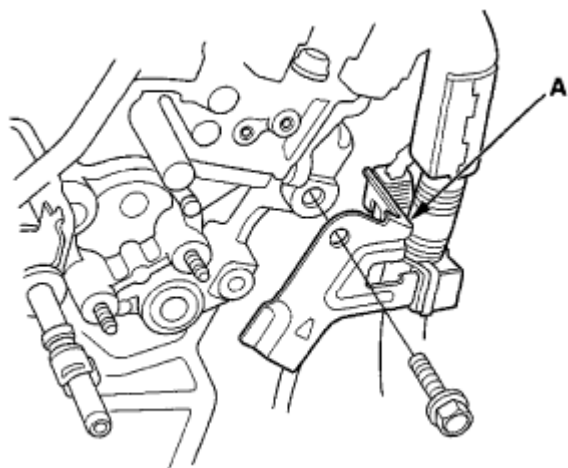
Identifying Rear Cylinder Head Harness Bracket
